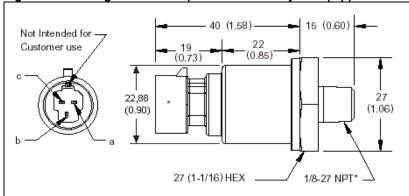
Mounting Dimensions (For reference only. mm/(in).)
